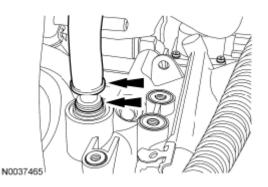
Locating Fuel Vapor Return Tube Courtesy of FORD MOTOR CO.
